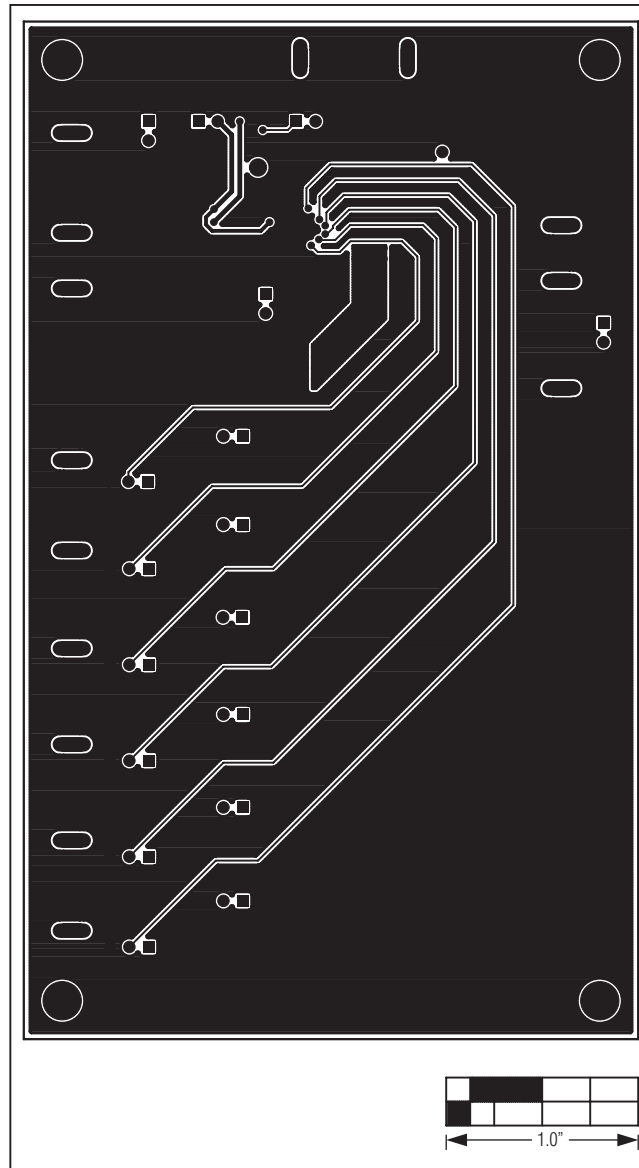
MAX17129 EV Kit PCB Layout—Solder Side
